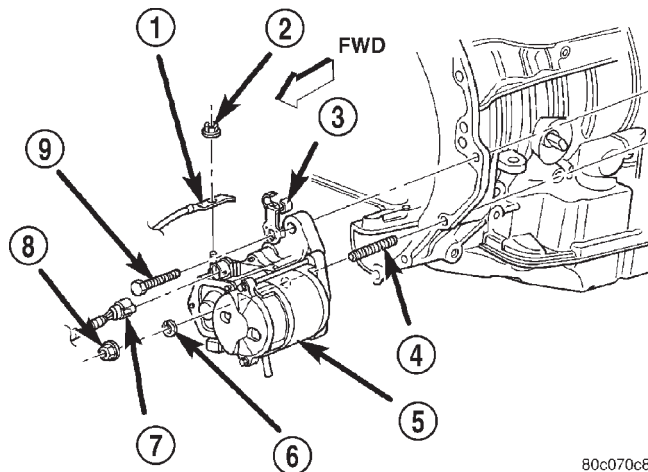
Starter Motor Remove/Install - All 3.9L and 5.9L Engine, or 4.7L Engine with Manual Transmission Only
